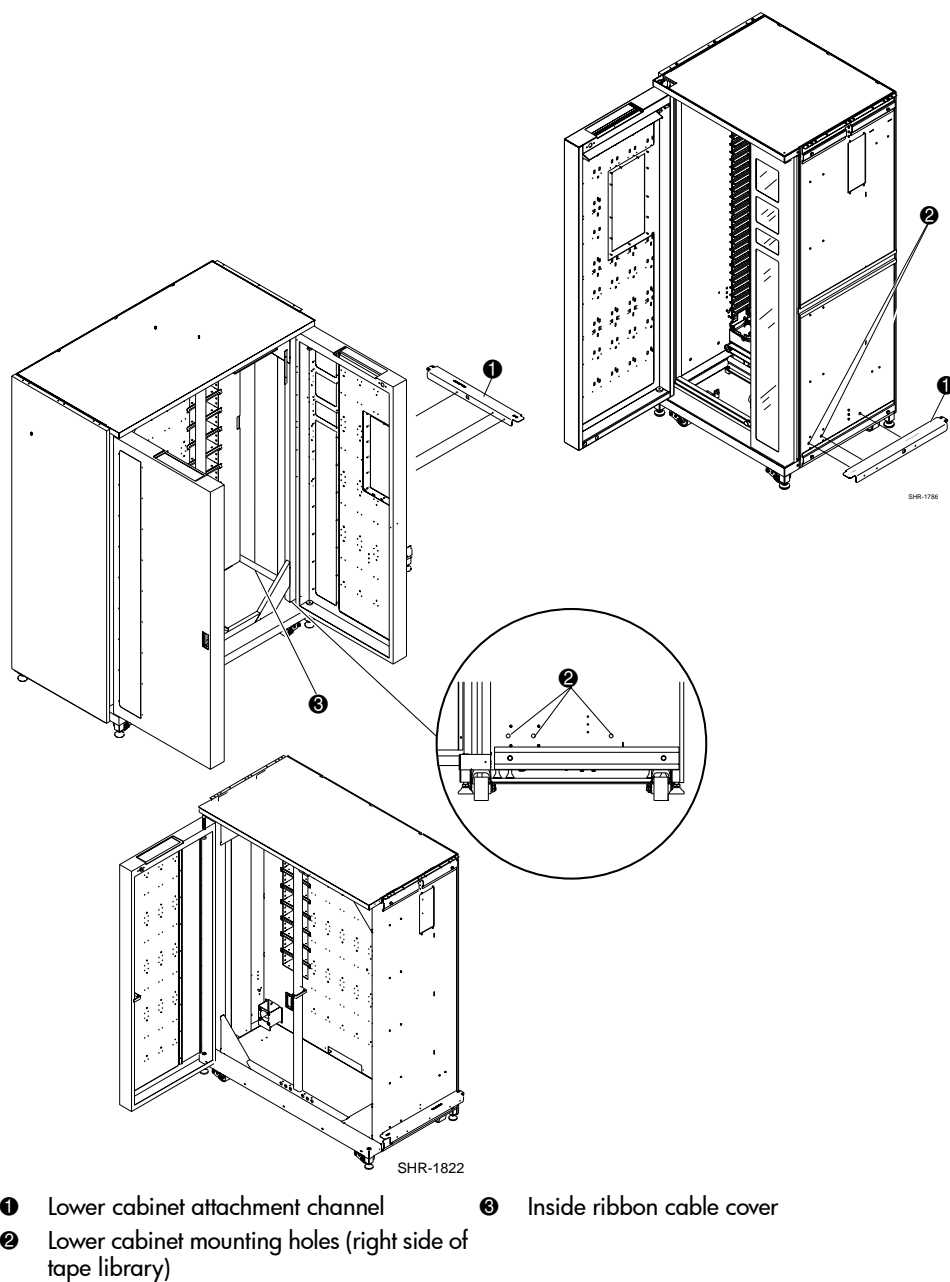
Installing the lower cabinet attachment channel (left tape library)
